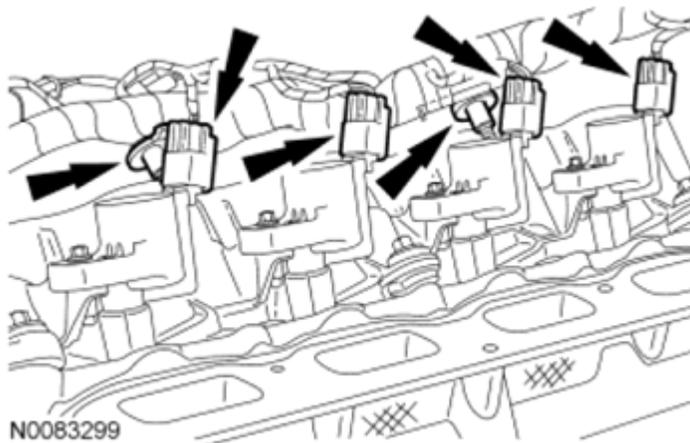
Locating Ignition Coil Electrical Connectors And Engine Wiring Harness Retainers (RH)
